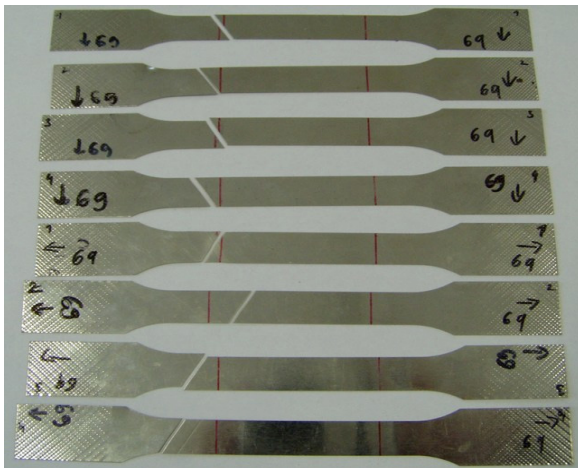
Specimen after uniaxial tensile test, tested material was TH 620 CA, thickness of the material was 0.175 mm
